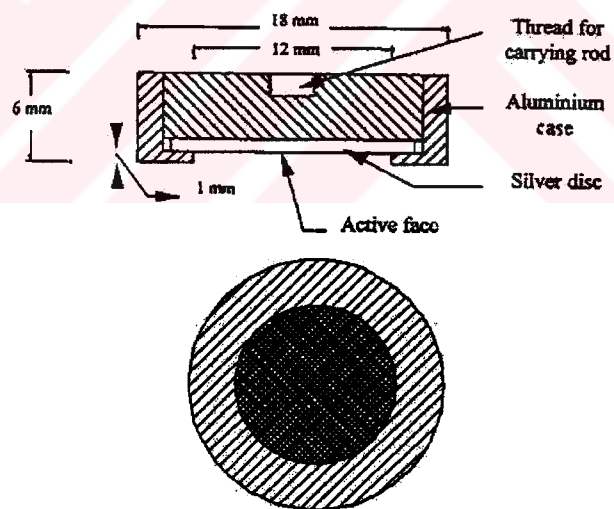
Strontium-90 beta source. Upper part shows section and lower part shows the front face. The radioisotope compound is incorporated into the front surface of the silver disc in a very thin layer (about 2mm for a 1.5 GBq source) there is then a 0.1 mm screen of silver on which is a protective coating of gold or palladium.
